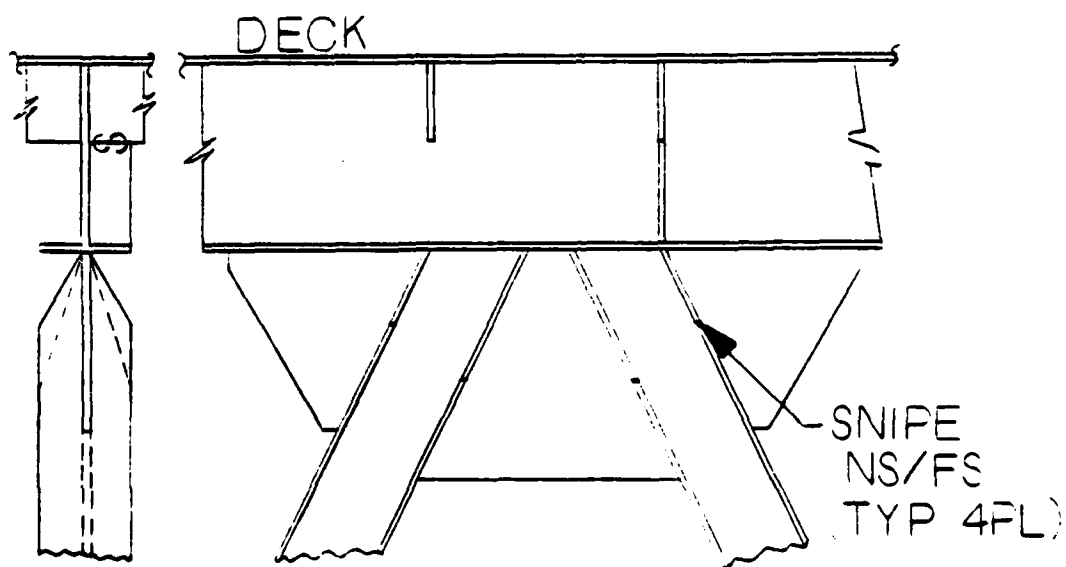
Typical Truss Joint with Flanges of I-Section Sniped
